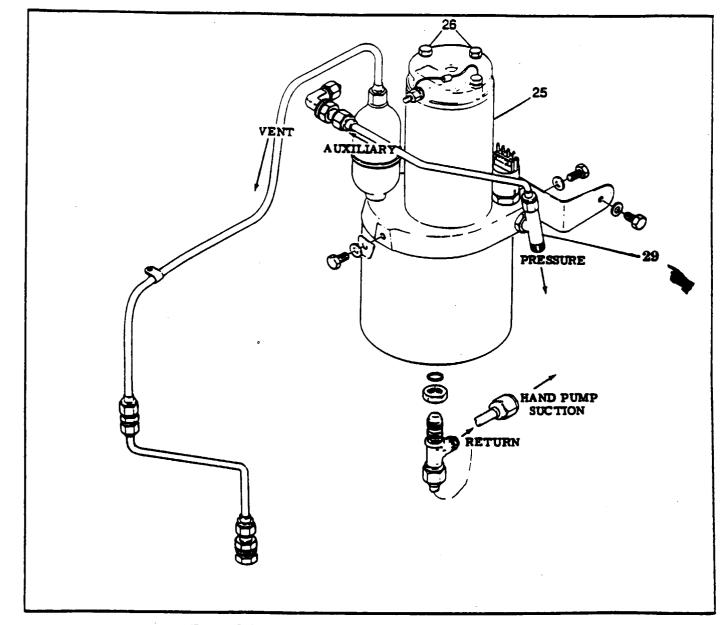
Hydraulic Power Pack Assembly (Sheet 2 of 2)
